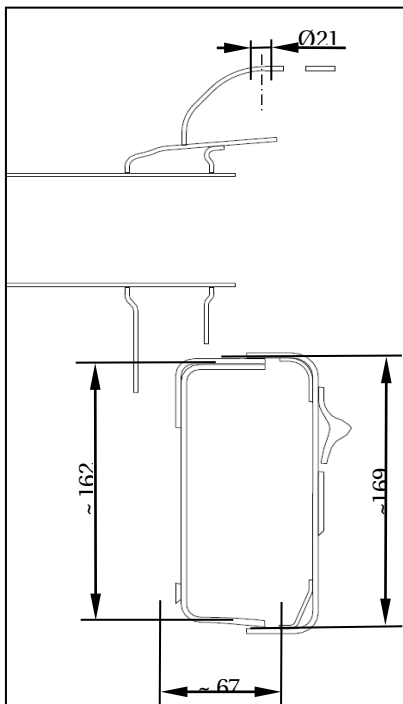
Section Q-Q (Amarok SC)
